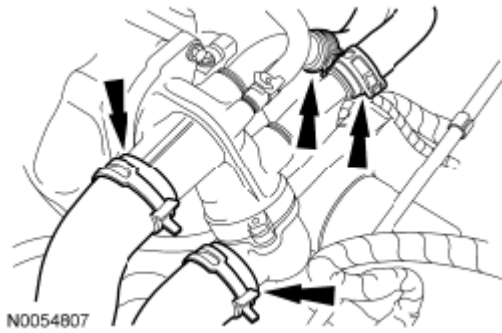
Locating Upper Radiator Hose, Lower Radiator Hose & Heater Hoses
